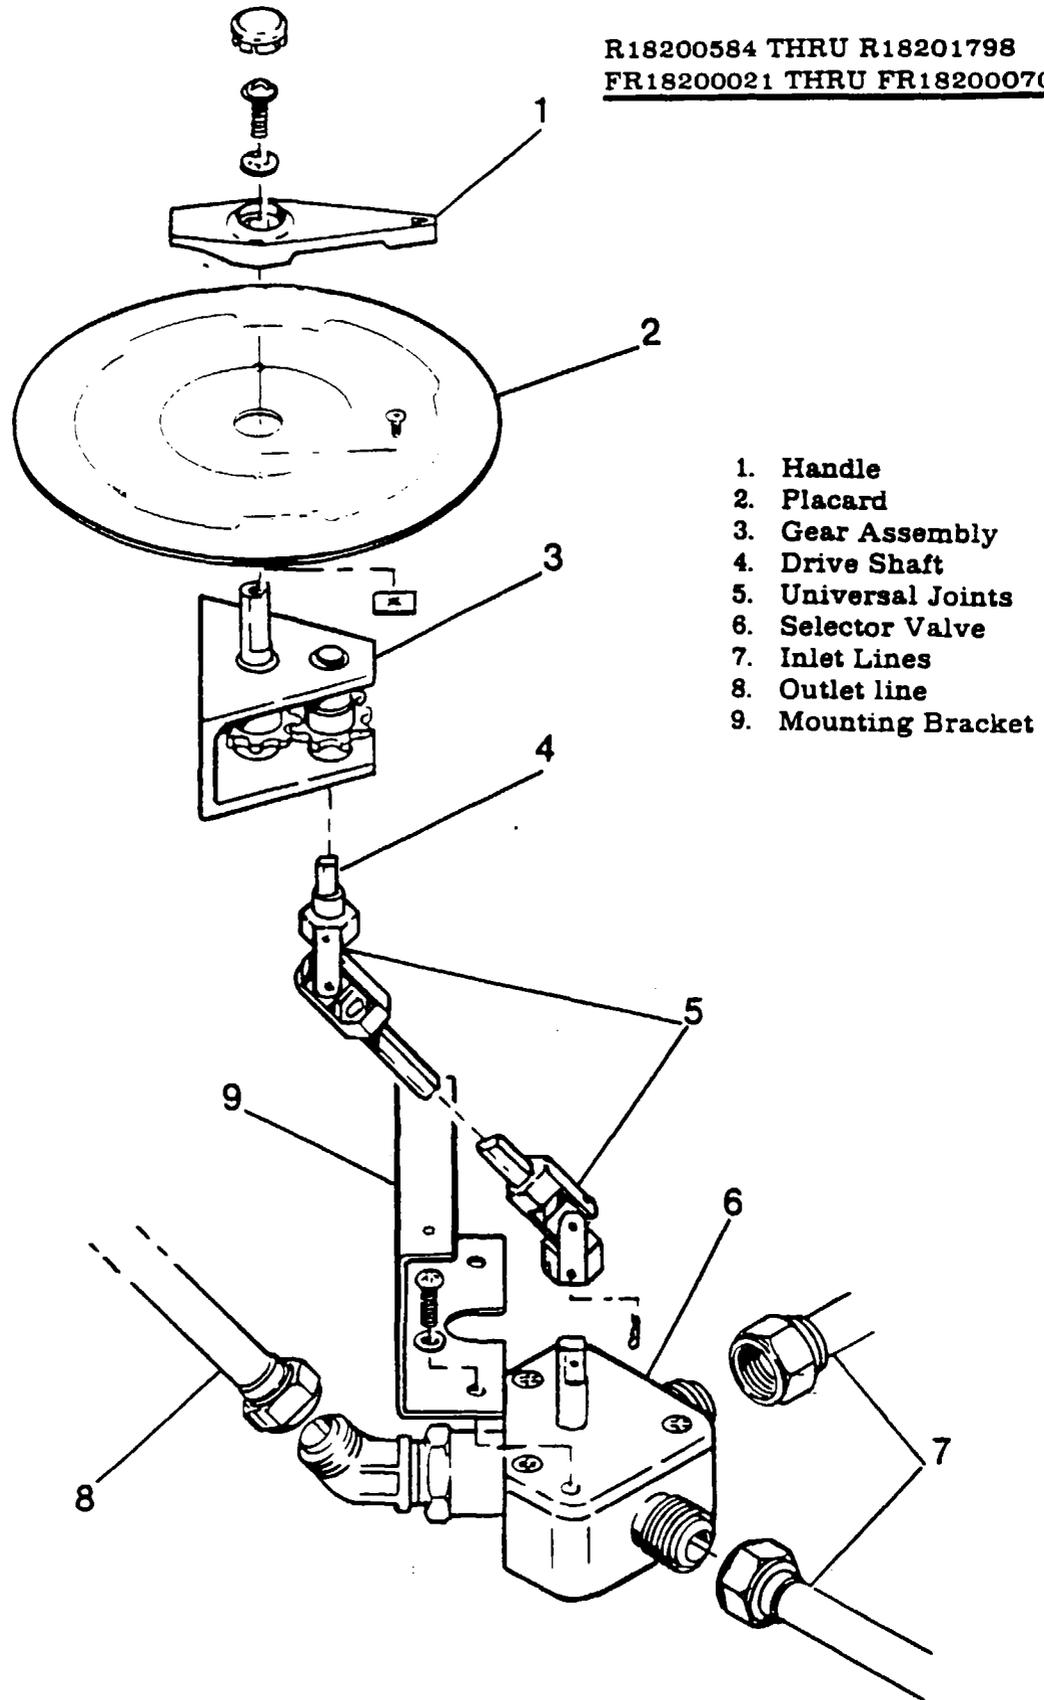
Fuel Selector Valve (Sheet 3 of 5)
